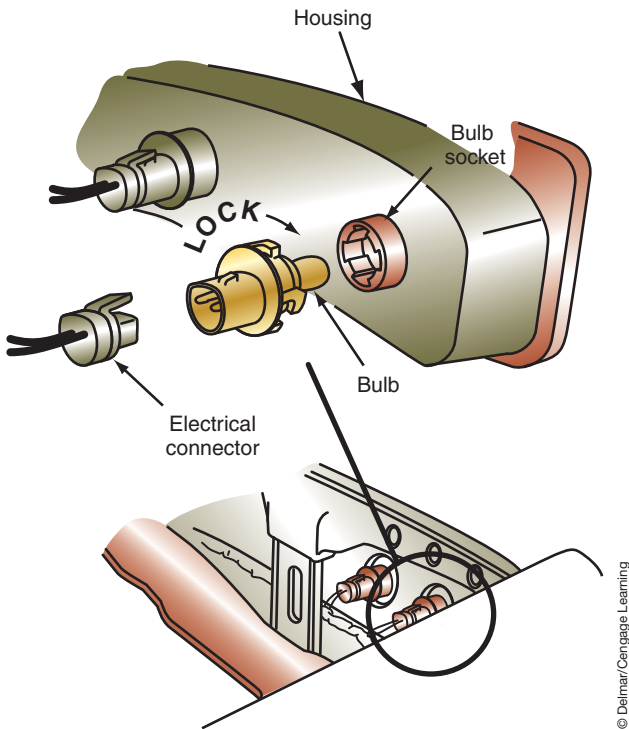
Bulb and socket removal from the taillight lens assembly.
